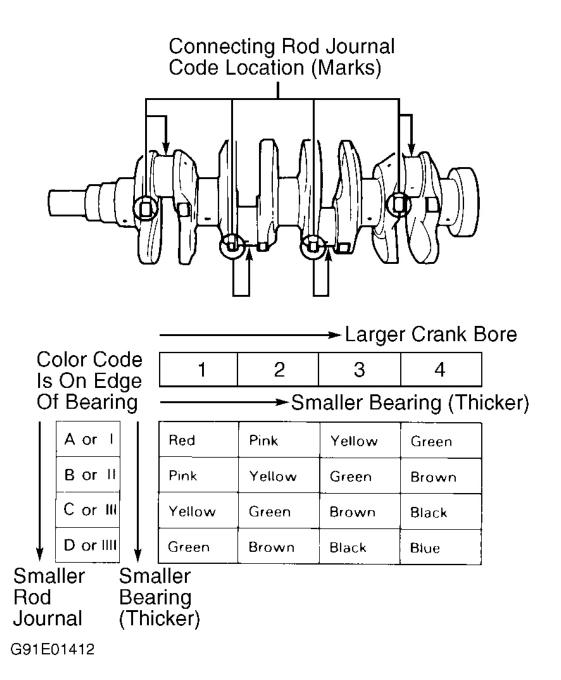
Connecting Rod Journal & Bearing Identification Codes Courtesy of AMERICAN HONDA MOTOR CO., INC.
